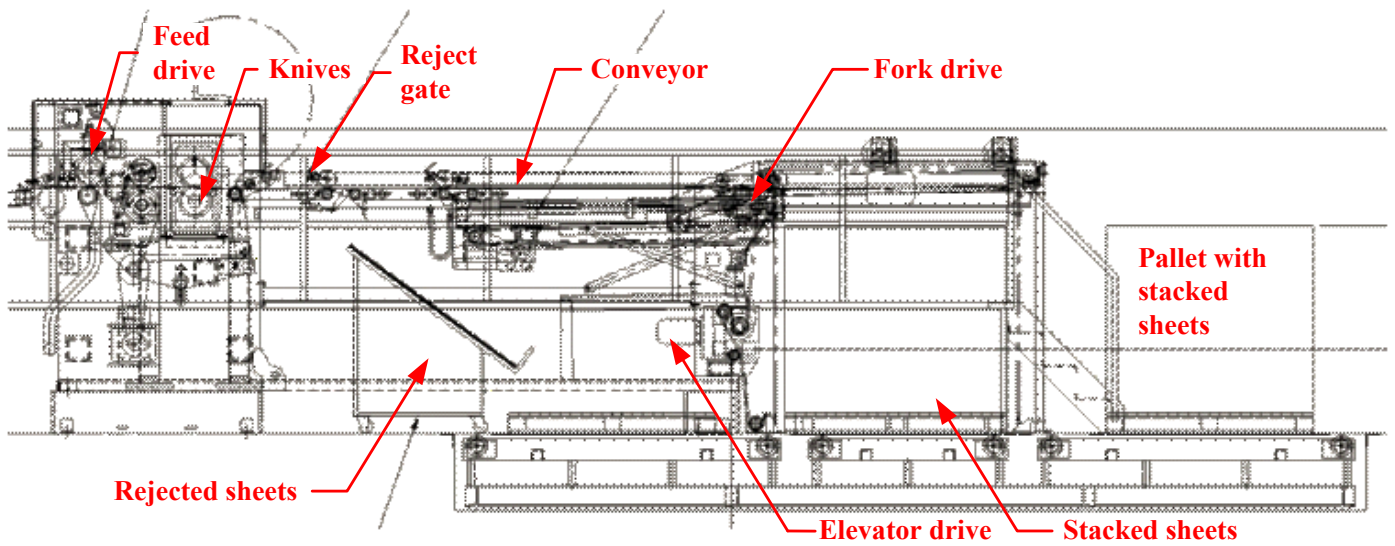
Technological parts of the transverse cutter - tape cutting and stacking of sheets
